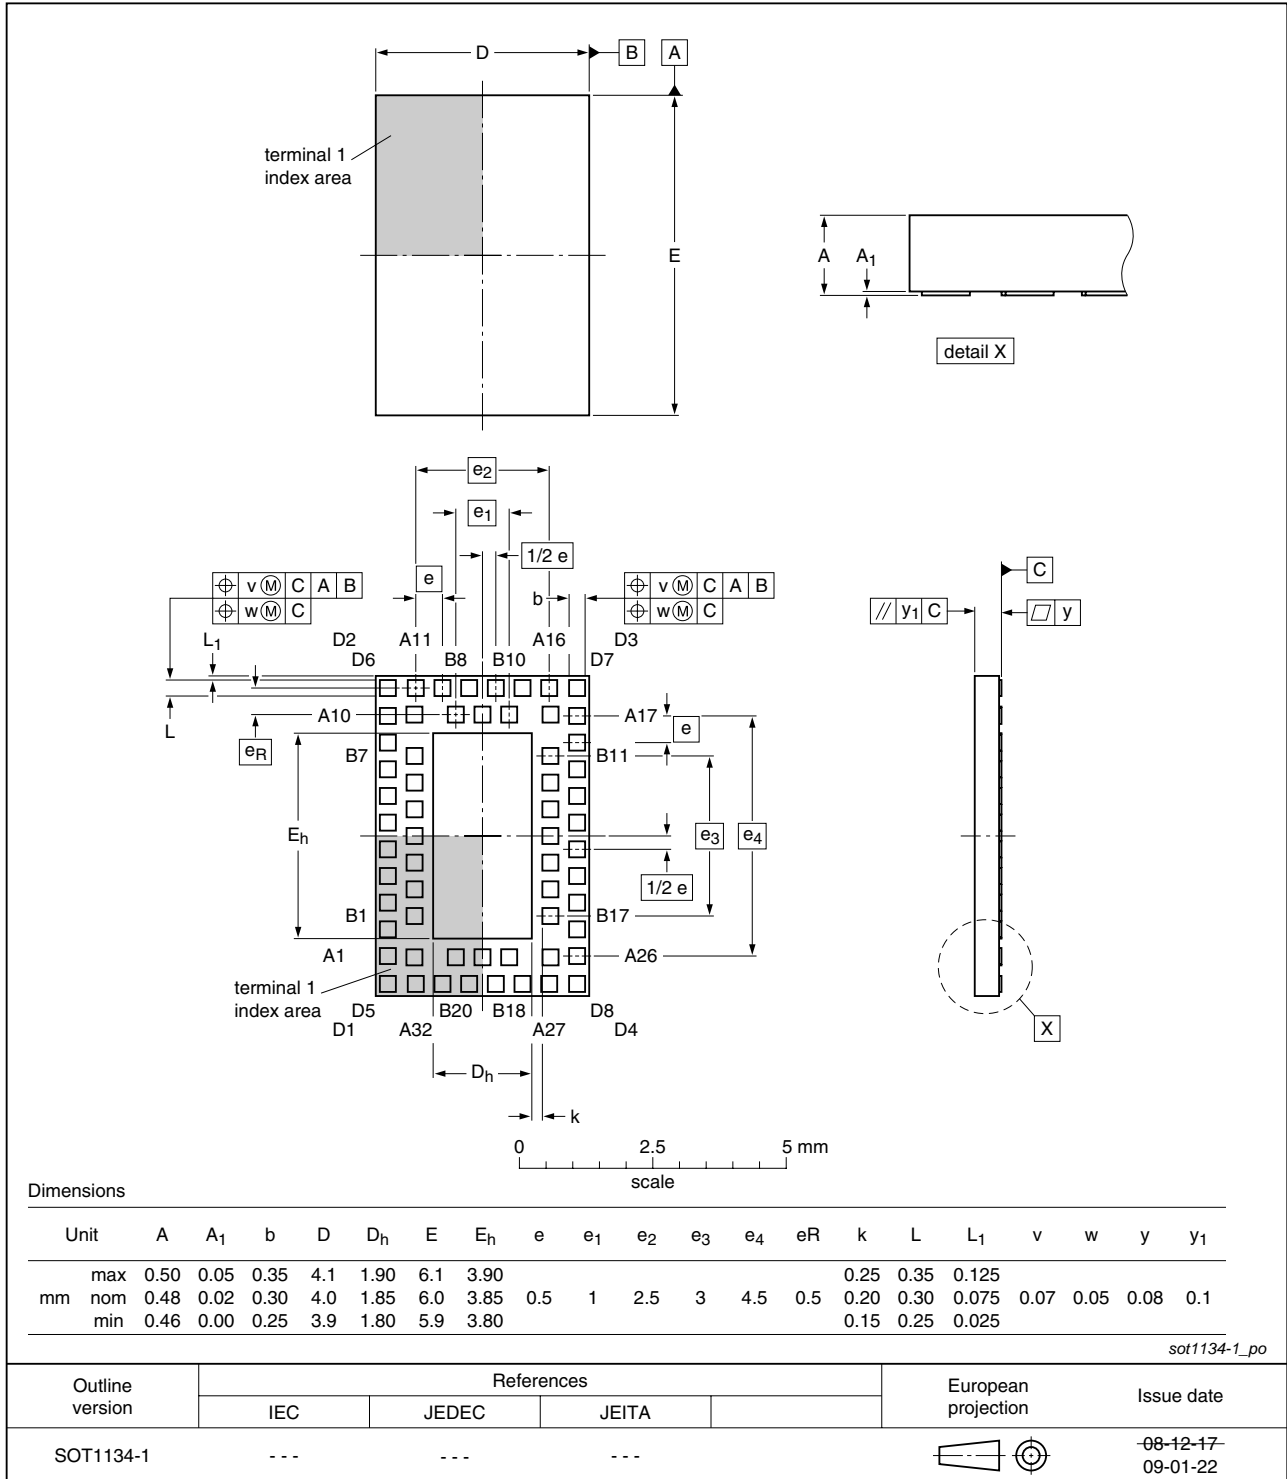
Package outline SOT1134-1 (HXQFN60U)
